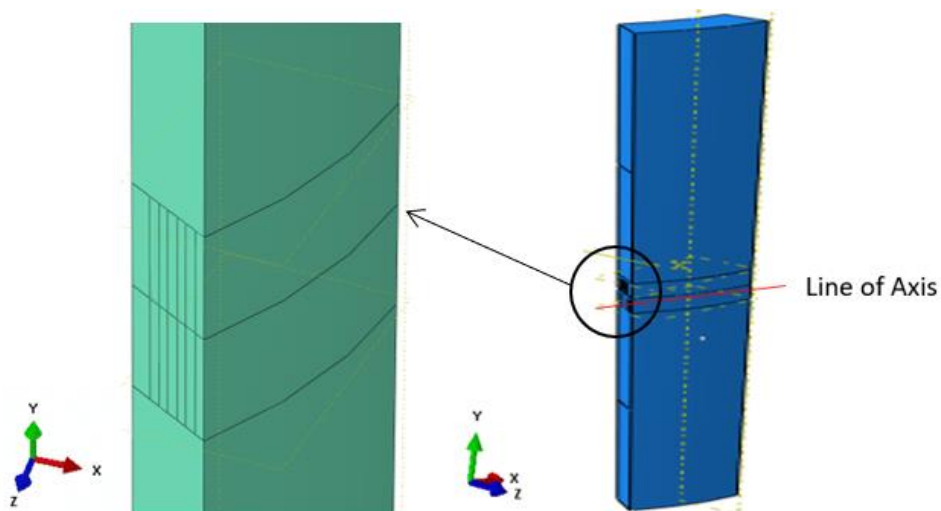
Geometry and weld line of a pipe stripe. Dimensions of the pipe stripe are OD 12.94, ID 10.35, thickness 5mm and height 160mm.
